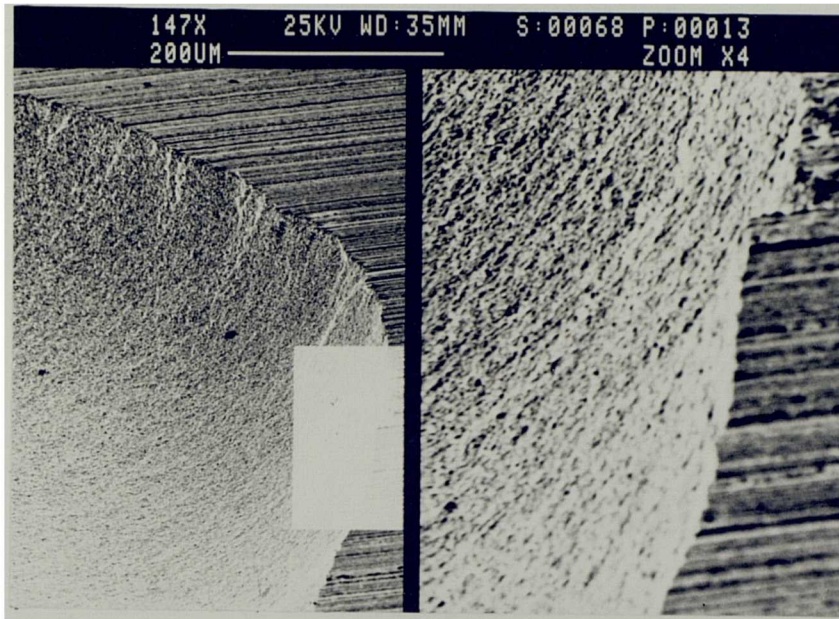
Longitudinal section through titanium alloy:tool welded junction showing layers from coated carbide (KC850) specimen.
